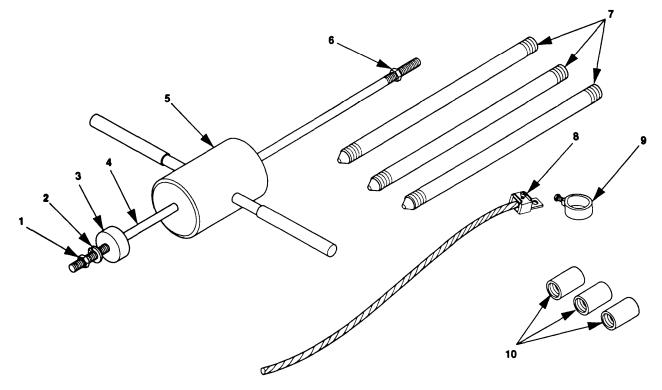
5. Ground Rod, Grounding Strap, and Sldie Hammer.
